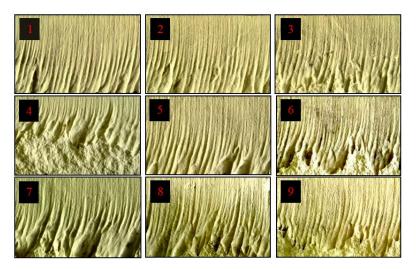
Cutting surfaces of the workpieces subjected to one-pass cutting for each test.
